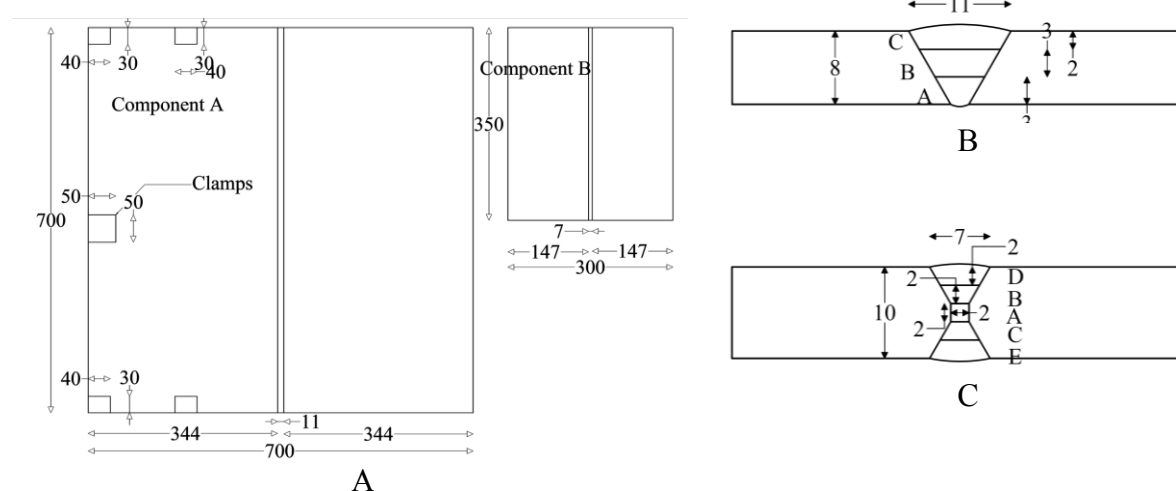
Investigated components – A: Plate dimensions for model A (left) model B (right) B: weld section of component A – C: weld section of component B
